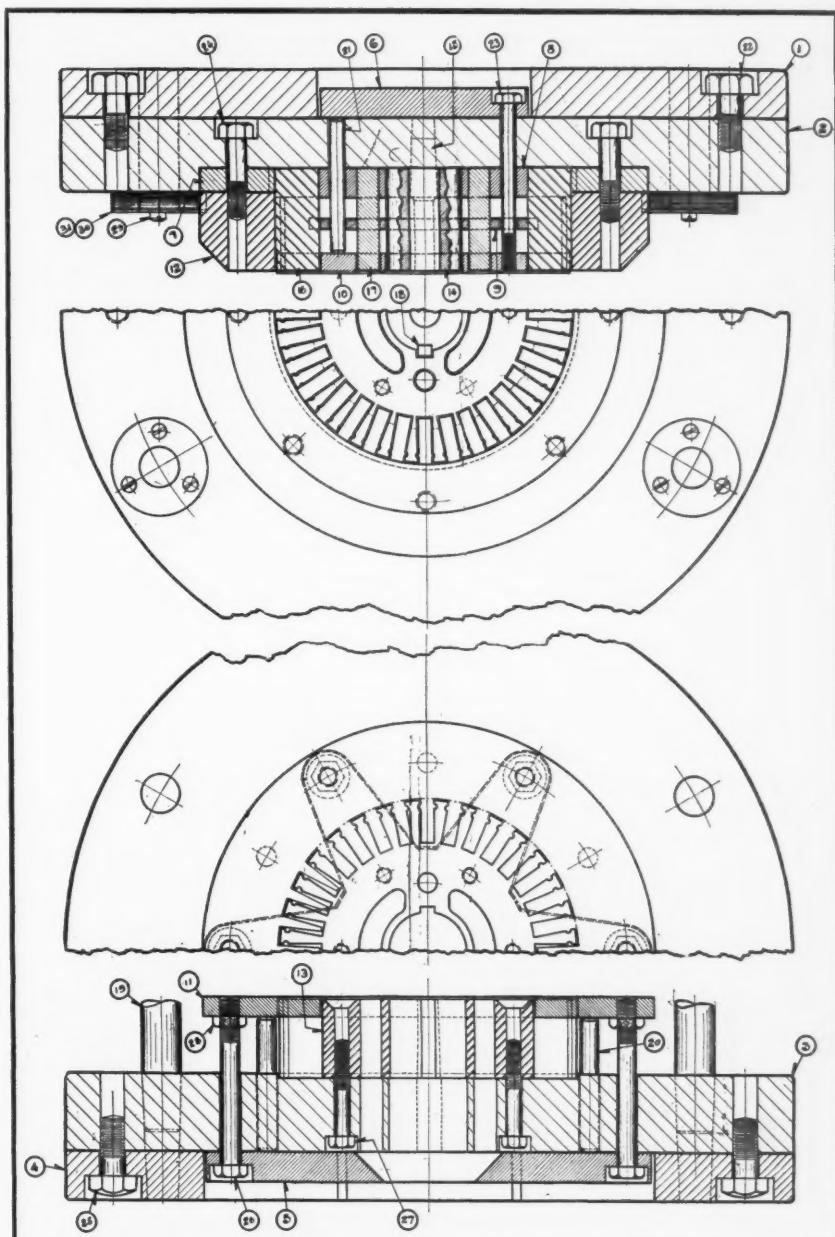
Another Compound Die which is Used for Producing Open-slot Rotor Laminations
